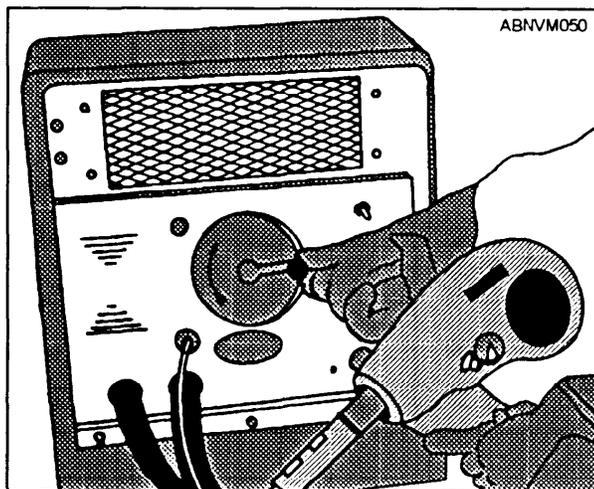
GMA welding equipment (AIRCO products).
